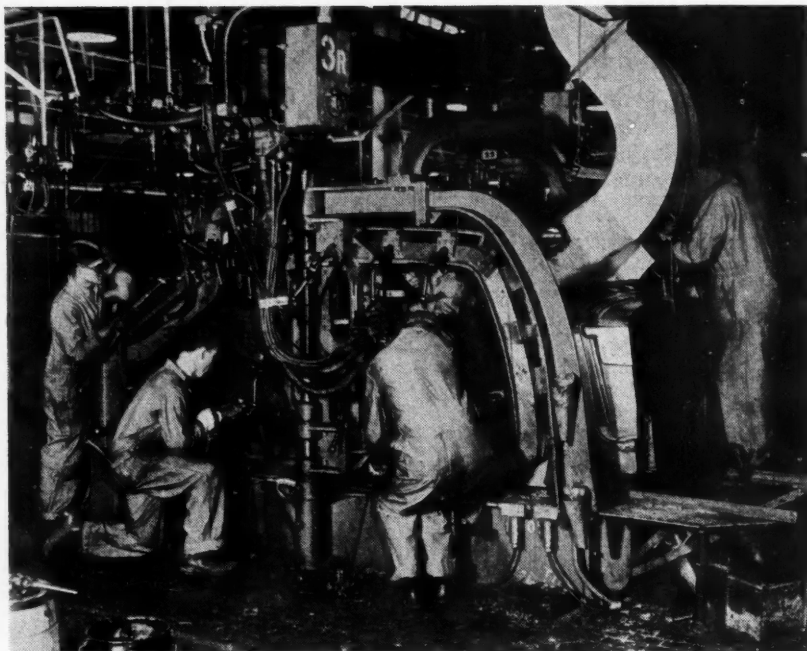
Set-up buck, one of a battery, in which the five main sections are aligned and welded together. Note the suction collector duct used to carry off fumes.
